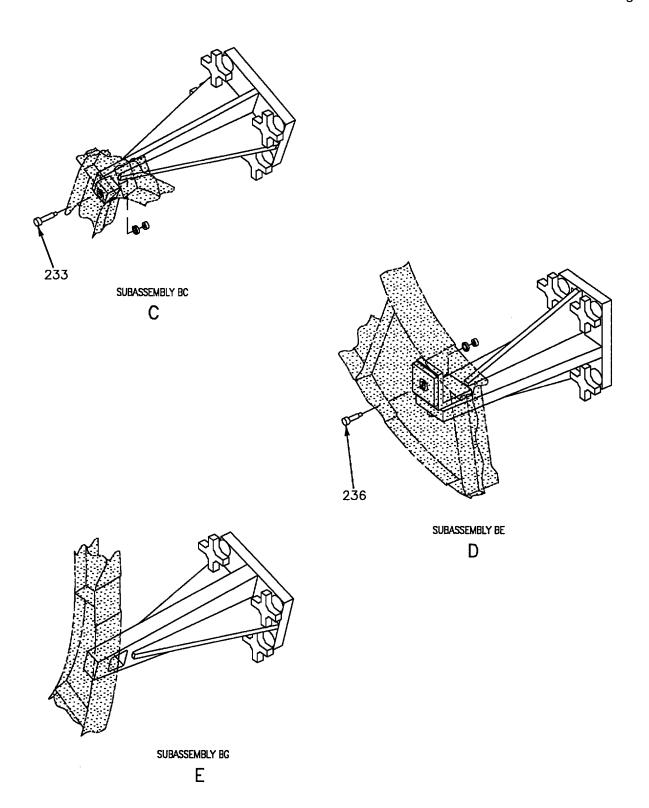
Installing Inlet in Maintenance Fixture (Sheet 4)
